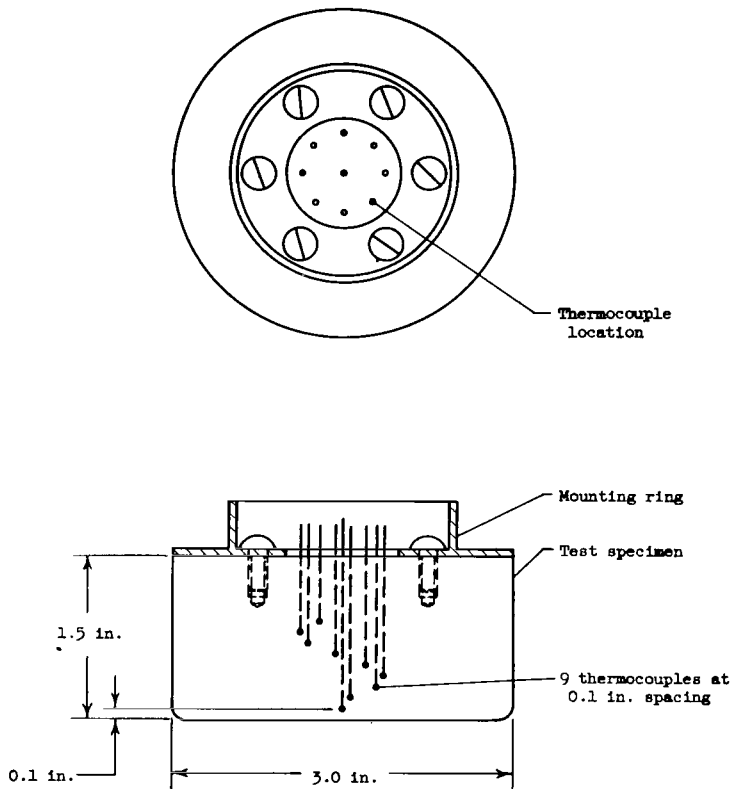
Details of specimen, mounting ring, and thermocouple location.
